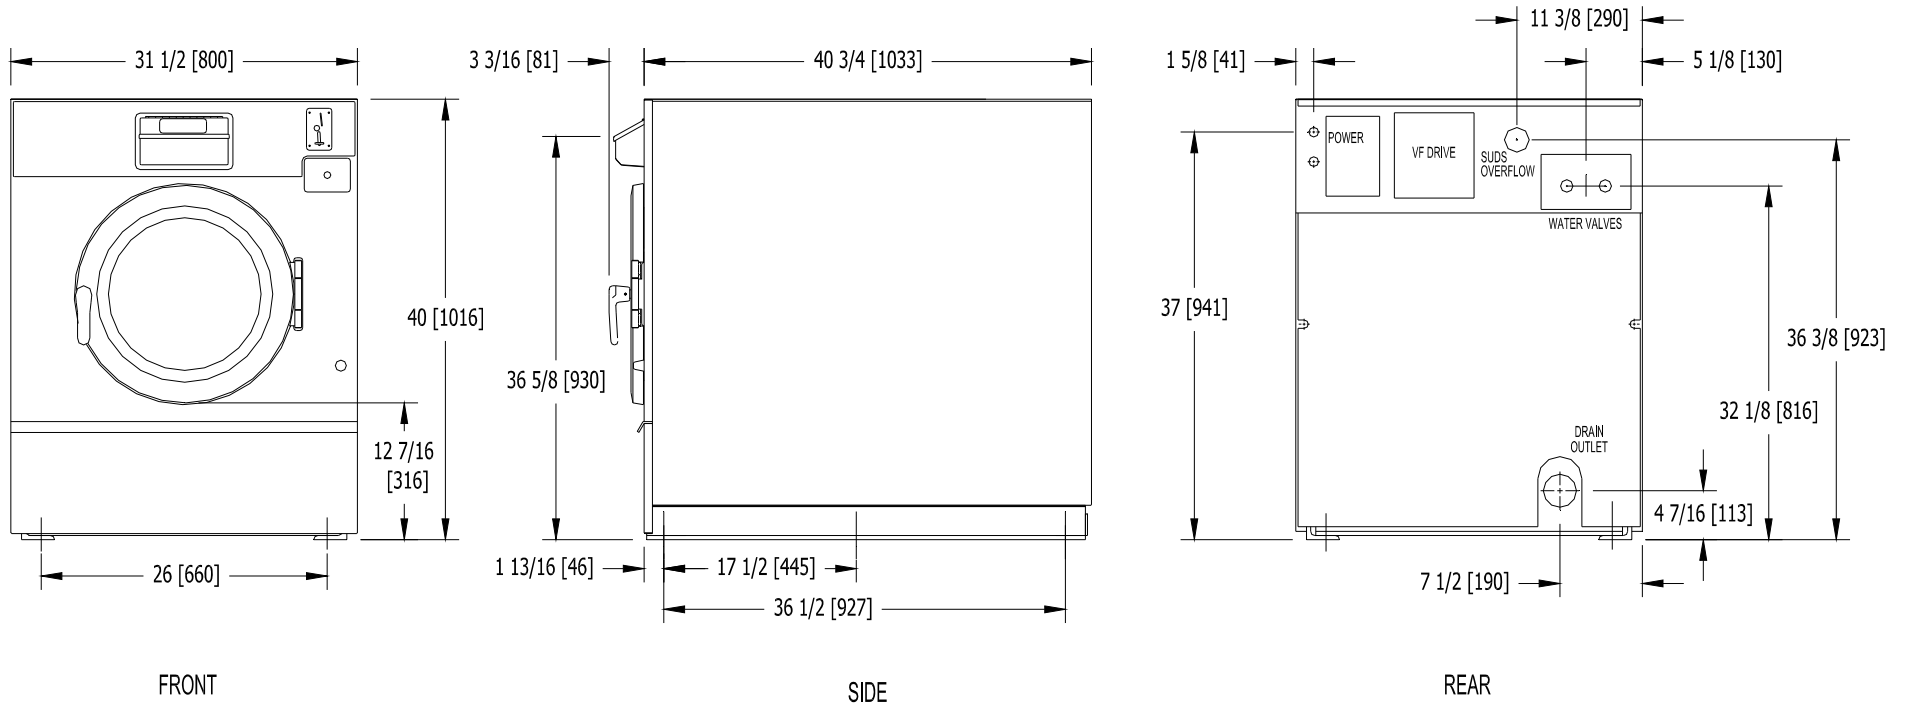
T-450 SWD Commercial Washer Dimensions
